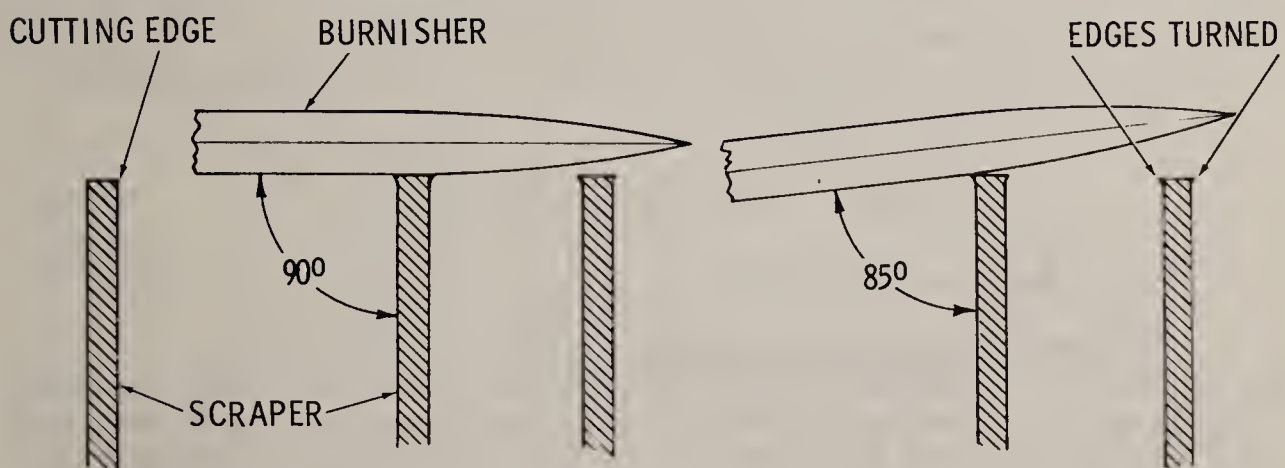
Application of burnisher in turning the edge of the scraper after filing and honing. The edge of the scraper is usually turned in two or three strokes with burnisher at various angles, the finishing angle being about 85 degrees.
